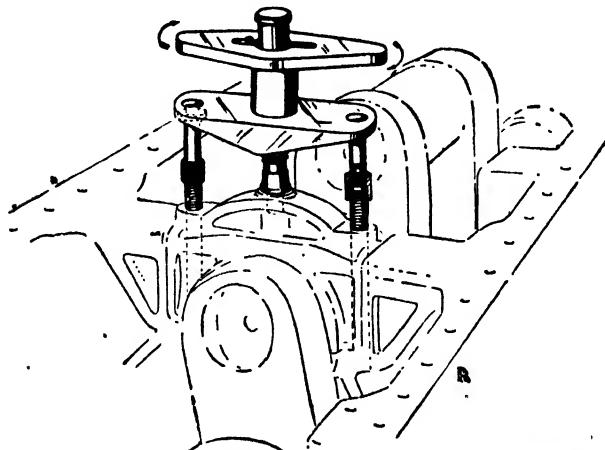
Extracting Main Bearing Caps from Crankcase.
